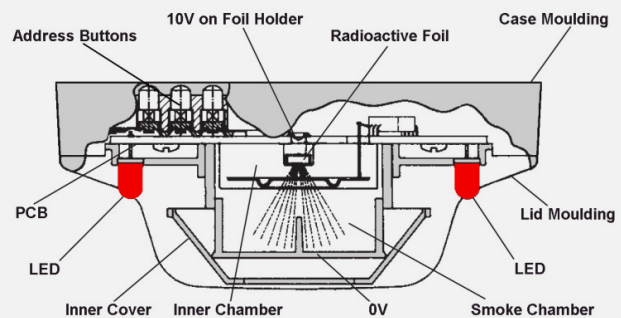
Sectional View – Discovery Ionisation Smoke Chamber
